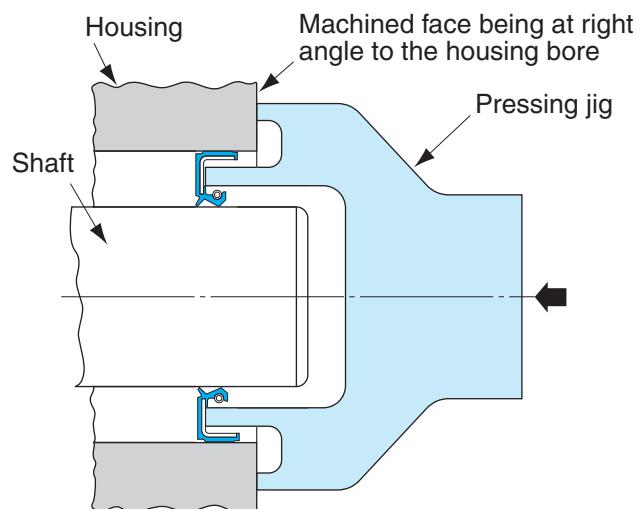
Recommended seal press-fitting jigs
